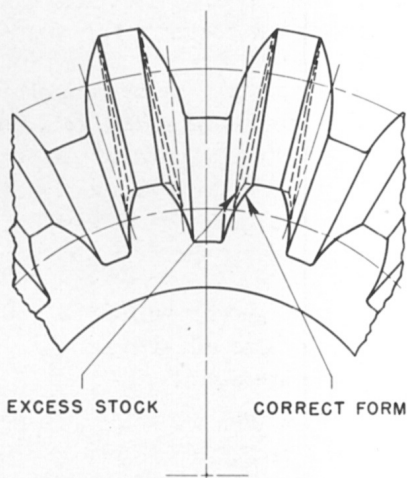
Effect of bevel gear cutter contour on the tooth shape.
